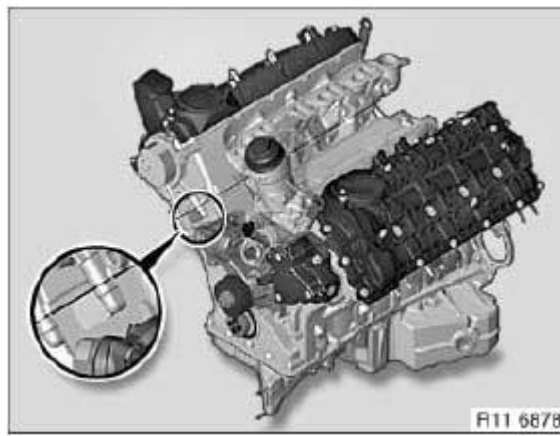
Identifying Engine Identification Mark - M47/M47TU/M47T2
